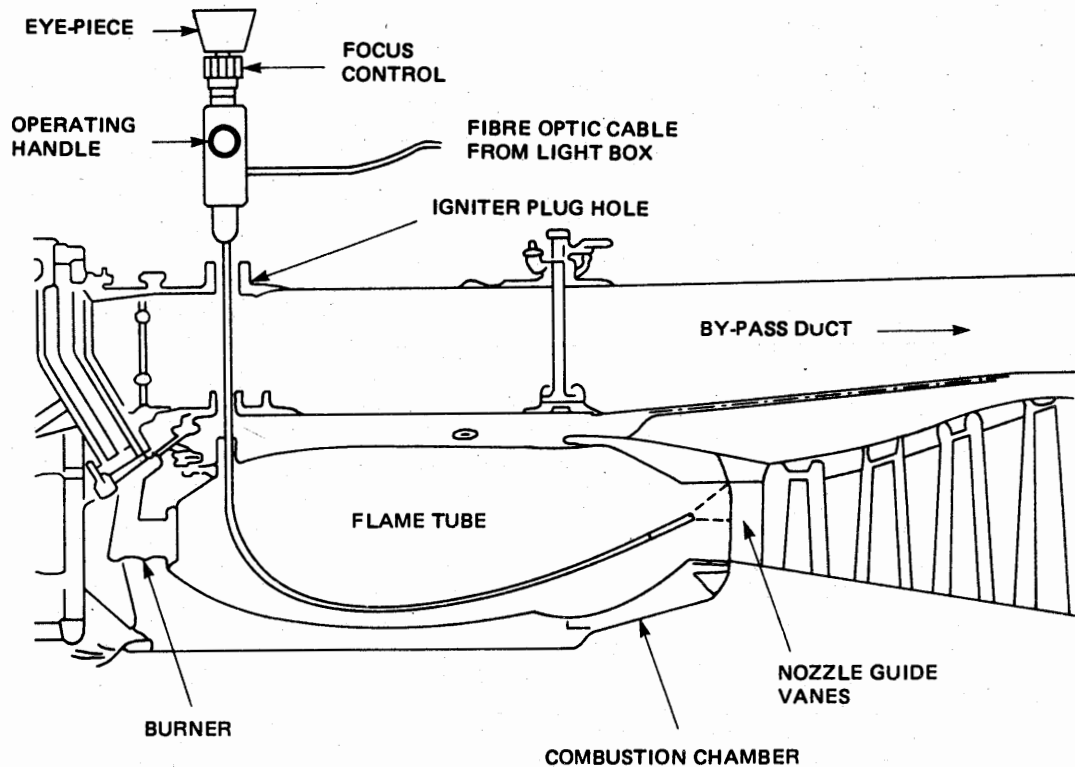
FLEXIBLE ENDOSCOPE INSPECTION EQUIPMENT
